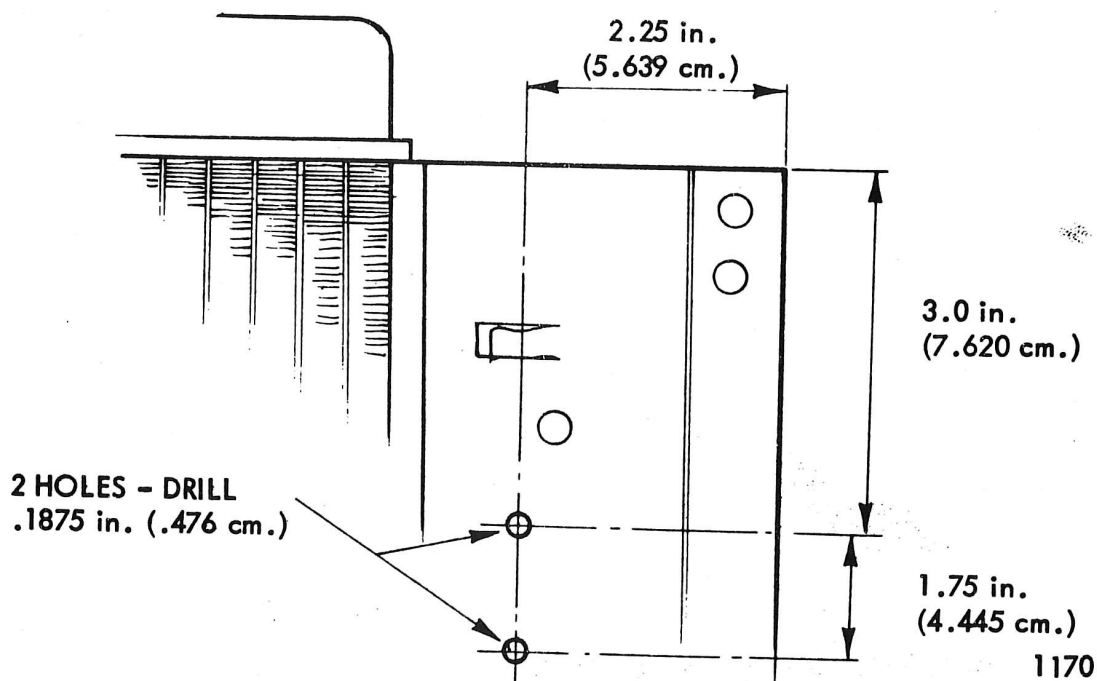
RECUPERATOR BOTTLE MOUNTING
